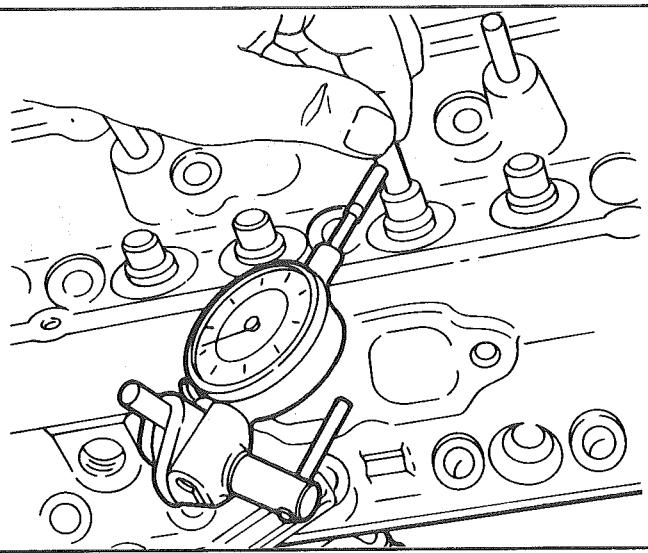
A3-18 Measuring Valve Stem Clearances-Typical
